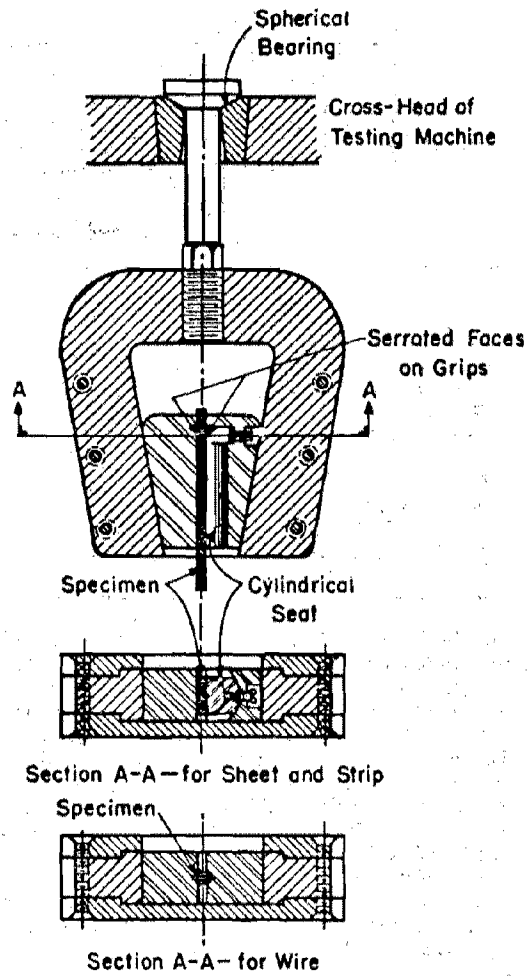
Gripping Devices for Sheet and Wire Specimens
